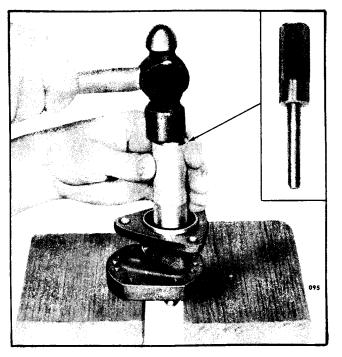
Installing Inner Oil Seal using Tool J 1508-8
